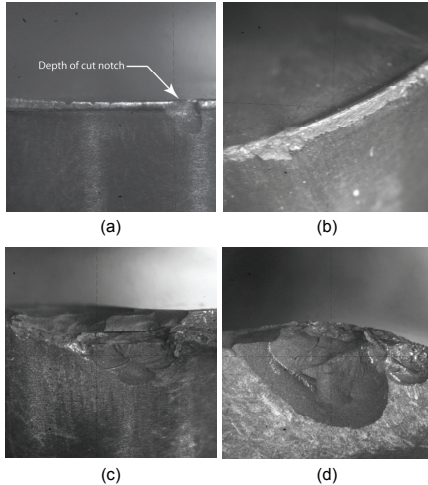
Tool wear: (a) notch wear, (b) flank wear, (c) edge chipping – flank face, (d) edge chipping – rake face.
